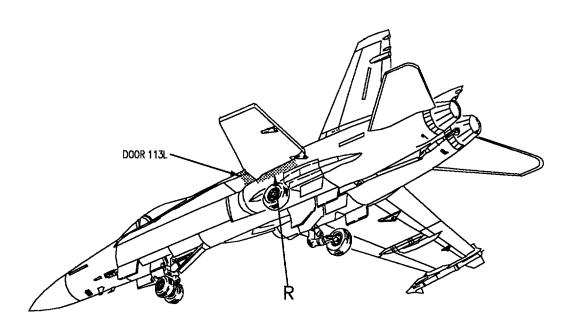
Inner Wing Removal and Installation Attachments (Sheet 1)
